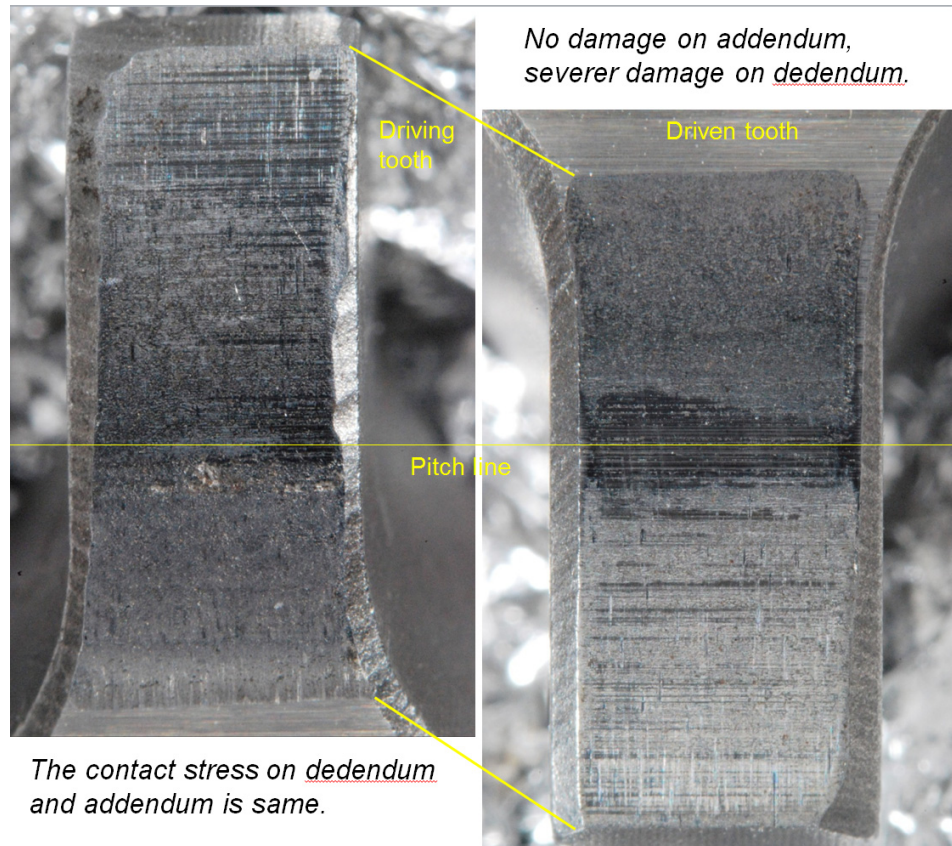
State of tooth flanks of driving and driven gear after endurance test
